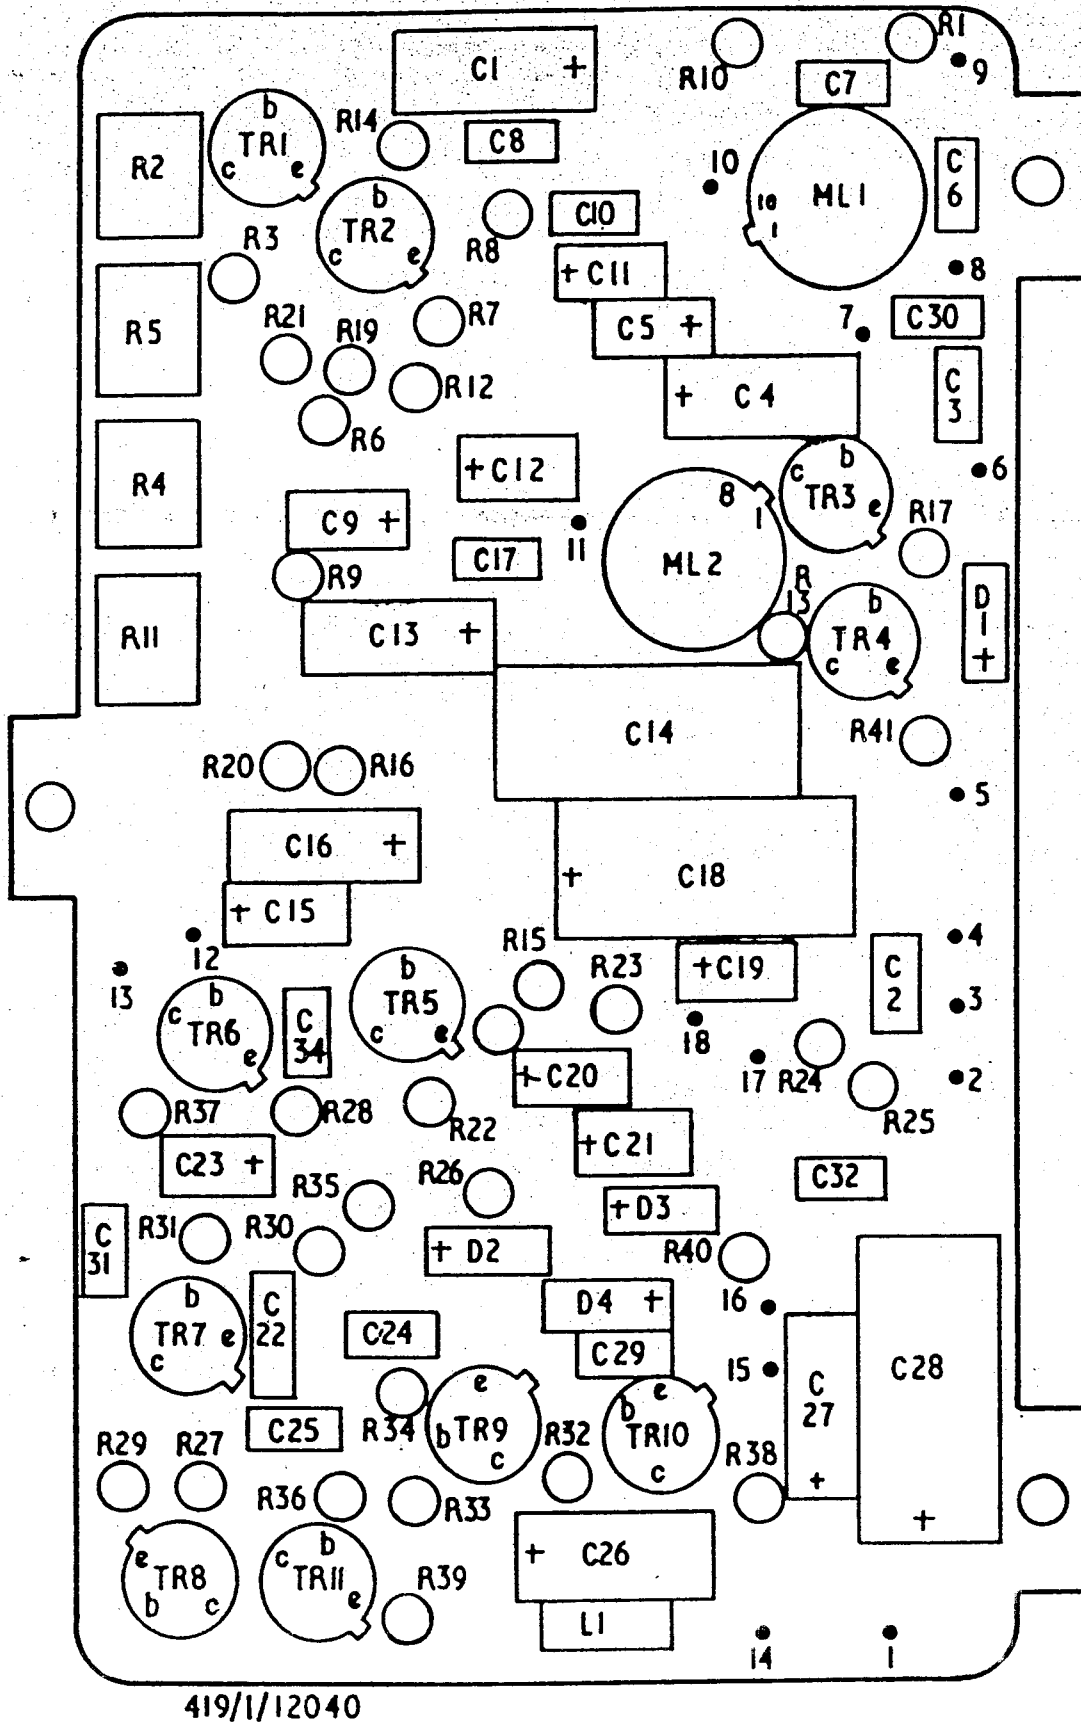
Receiver AF and AGC pec (unit 6b) — component layout
